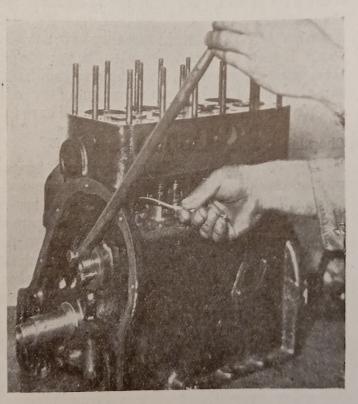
REFITTING CONNECTING ROD AND PISTON Passing the piston between the crankcase and crankshaft on the opposite sides to camshaft.
